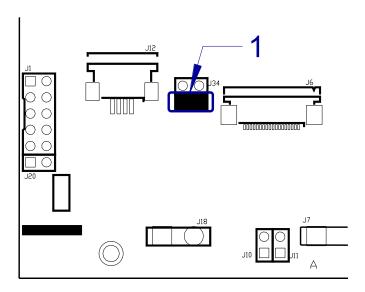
Service jumper position on PCB of AMR-OP70/xx
